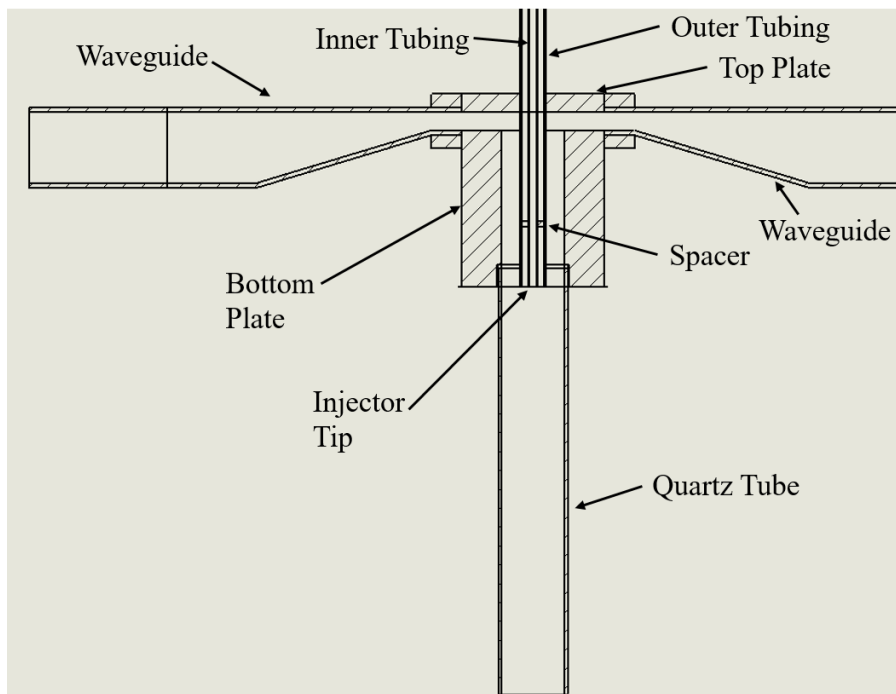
Major Components of Burner Attached to the Waveguide. The burner consists on a coaxial injector that is attached to a waveguide to couple microwave power. The coaxial injector is made up of an inner tube and outer tube that are used to carry gas for a plasma, fuel and oxidizer. The top plate and bottom plate attach the injector to the waveguide and form a seal securing the electromagnetic radiation. The waveguide allows for directing electromagnetic radiation from where it is generated to the injector. A spacer is used as one of the adjustable tuners that can be moved to optimize coupling, and in this case for a resonating cavity
